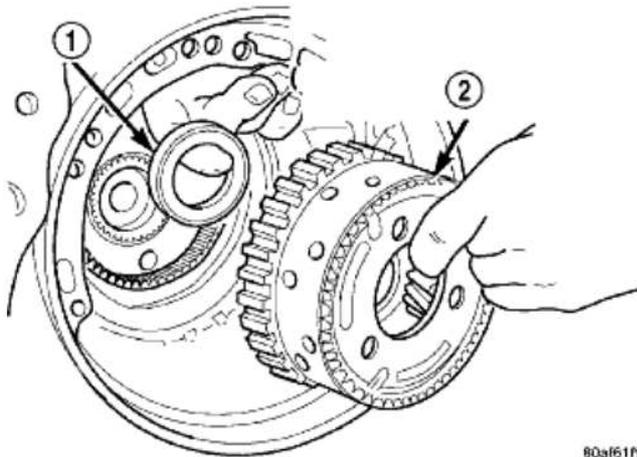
Removing/Installing Front Carrier/Rear Annulus Assembly
